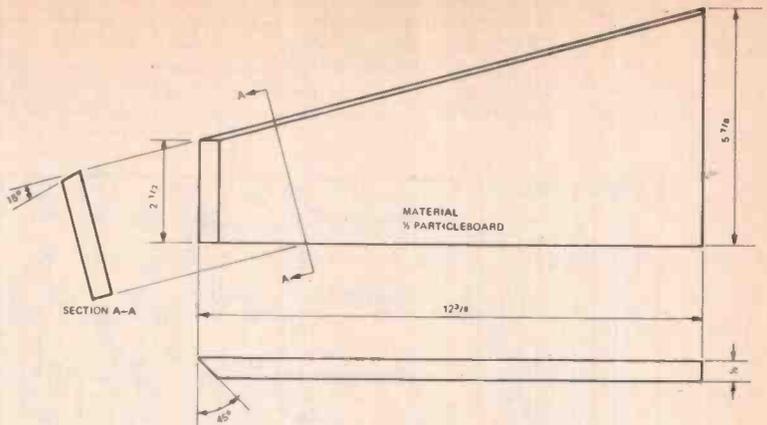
Cabinet sides — two required. Note that boards should be mirror image of each other, that is, chamfers should have opposite slope.
